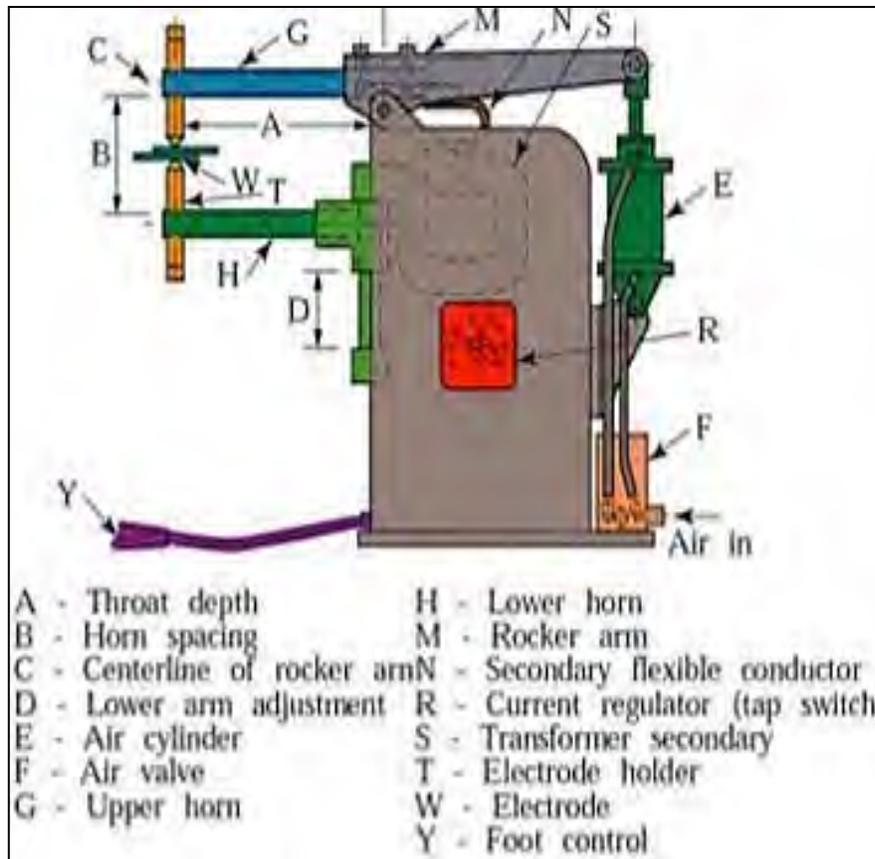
Illustration of Rocker Arm Spot Welding Machine (Kalpakjian and Shmid, 2006).
